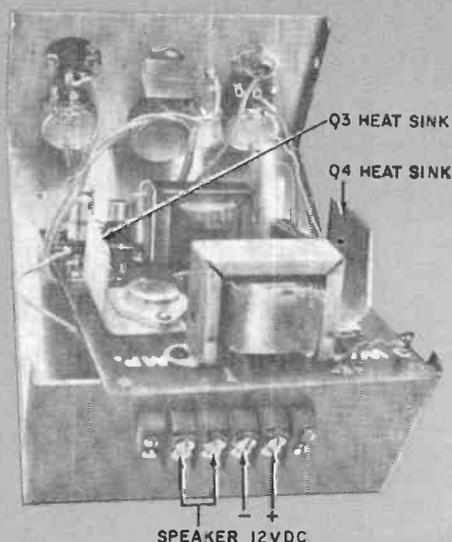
Completed circuit board, ready to be installed in aluminum case.
